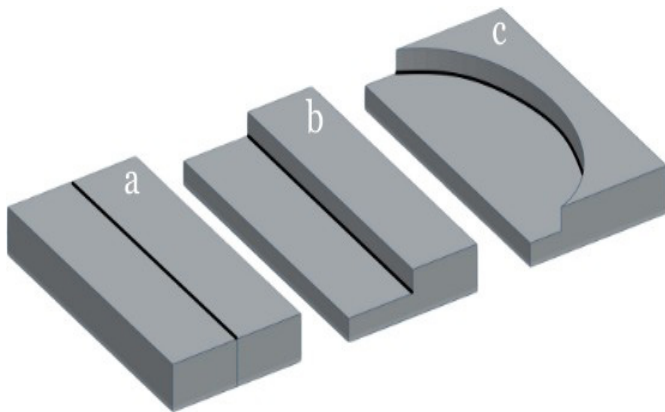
The comparison of three weld pieces: (a) butt joint (b) lap joint (c) circular lap joint
